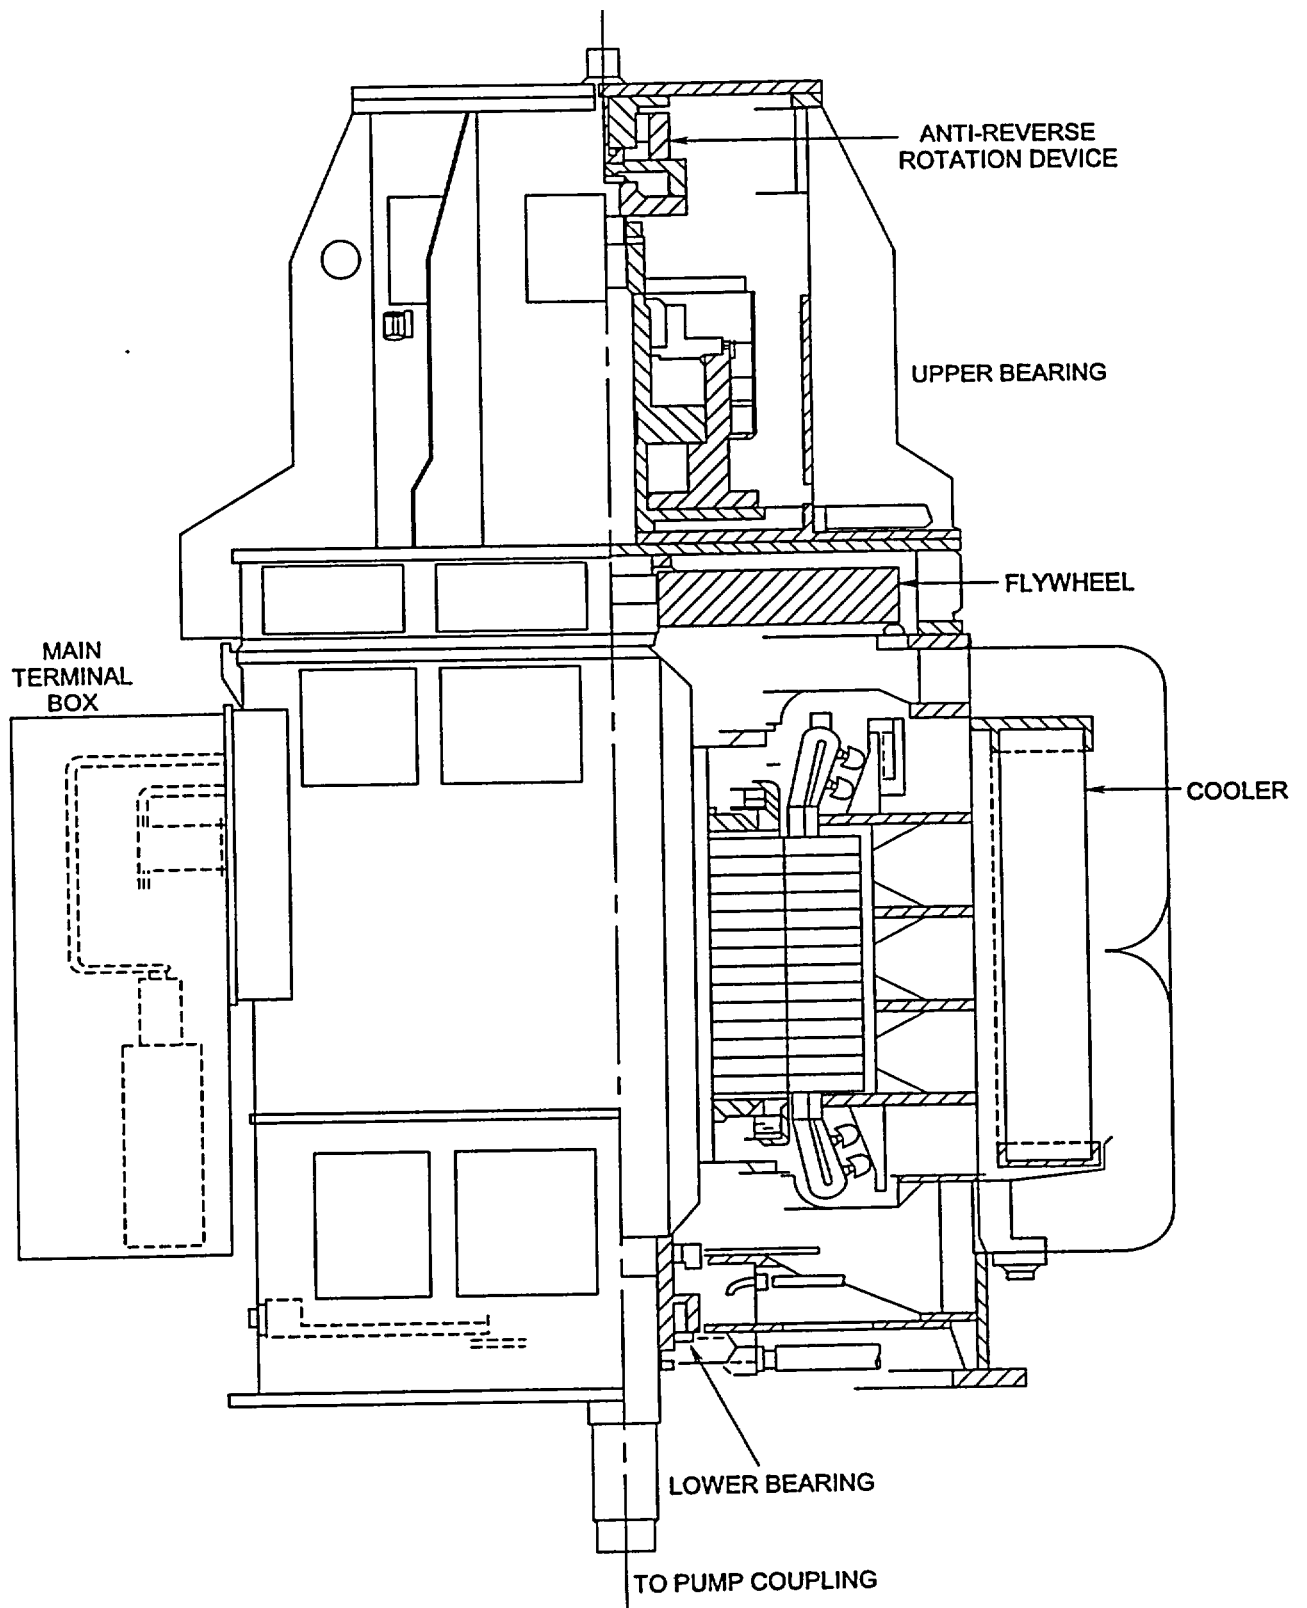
Reactor Coolant Pump Motor Assembly
